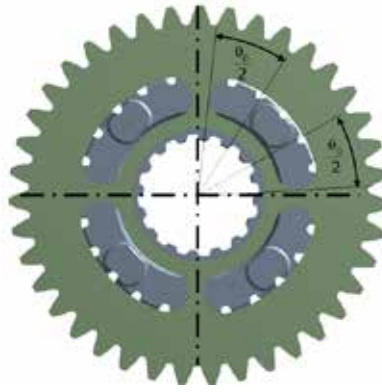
Modelling remarks. Multibody analysis. Engagement between driven first and fifth gears. Initial configuration
